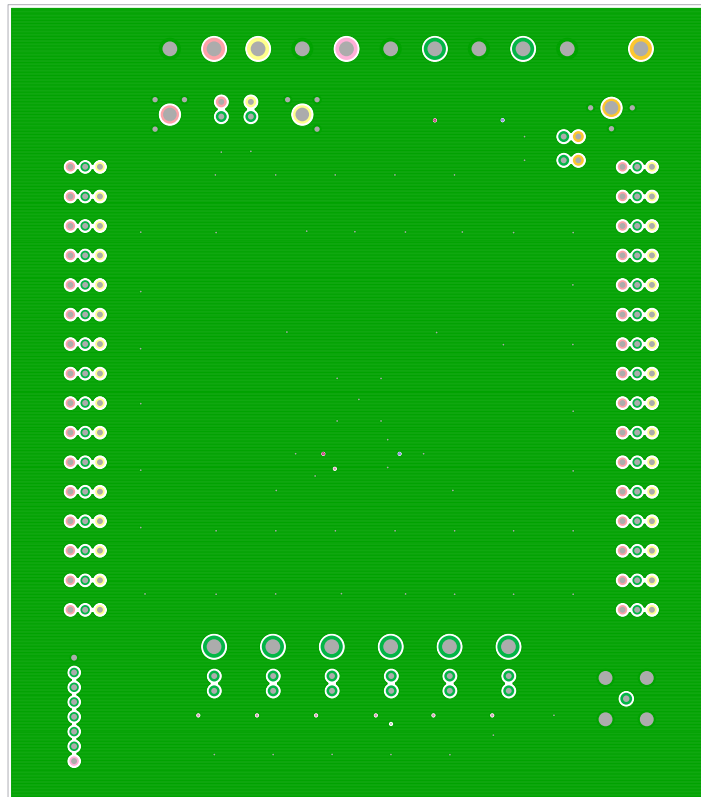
PCB - INNER LAYER 1 (TOP VIEW)
